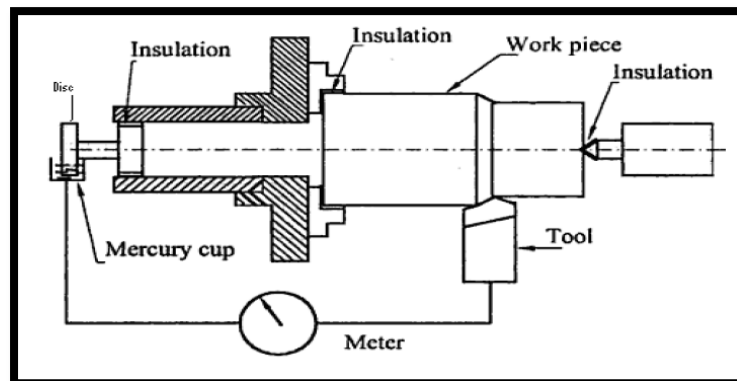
Schematic experimental set-up using Tool-Work Thermocouple technique [21]
